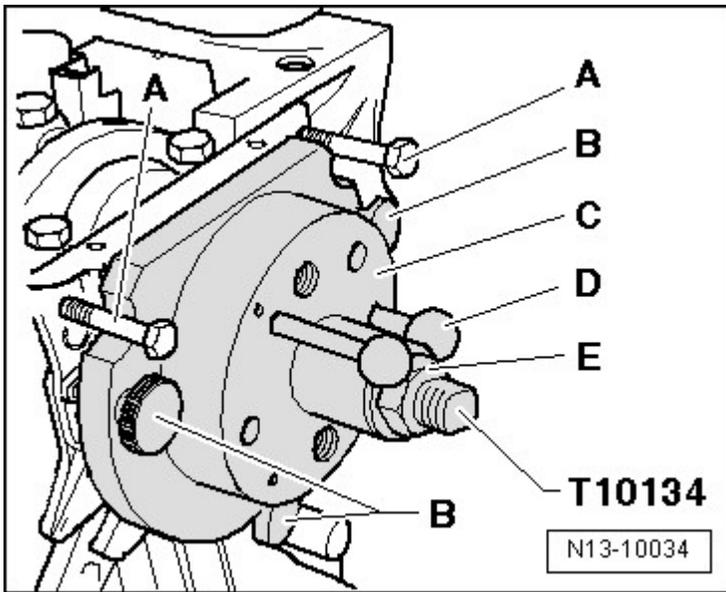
Checking Installed Position Of Sensor Wheel On Crankshaft
